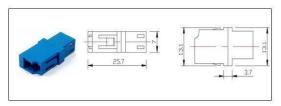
LC RJ45 Simplex Adaptor Appearance & Dimension
